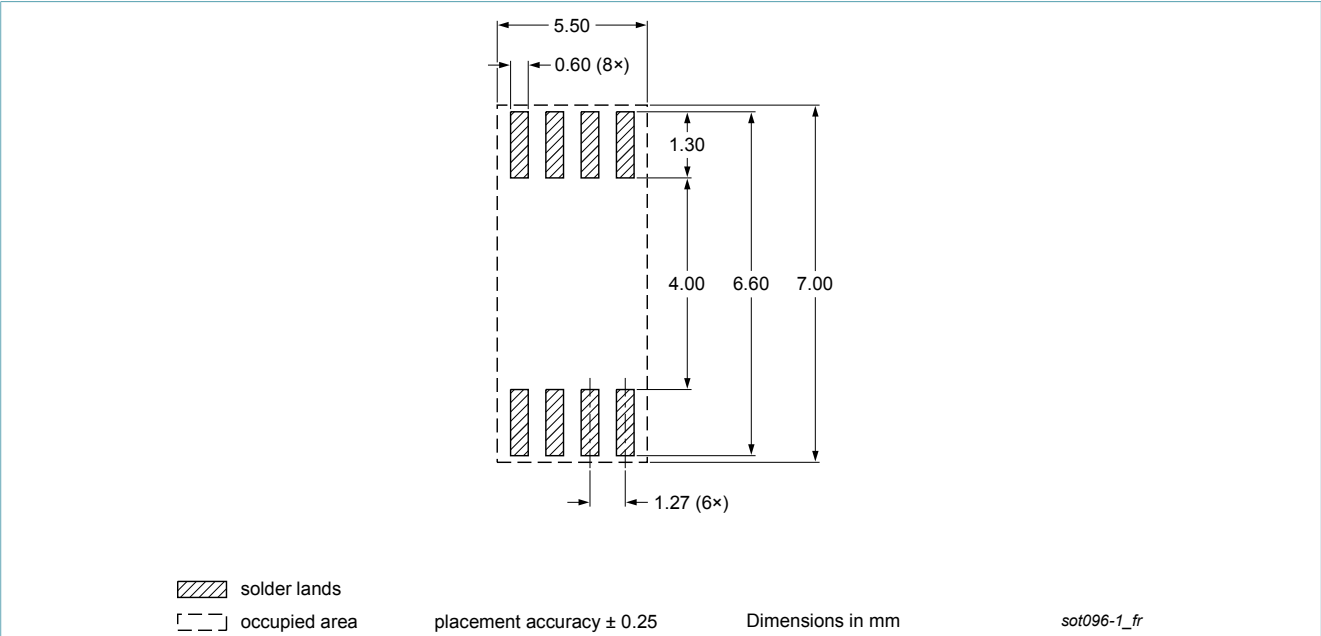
Reflow soldering footprint for SO8 (SOT96-1)
